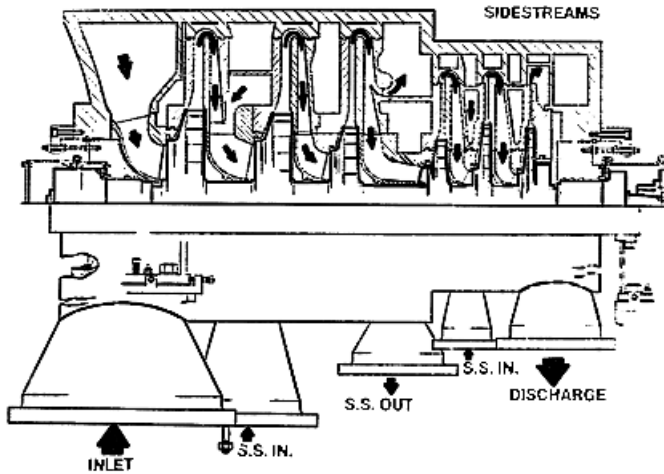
Cross-sectional view of a sidestream compressor. (*Dresser-Rand Company, Olean, N.Y.*)
